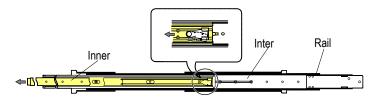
Removing the Inner (Rev.C or later)
